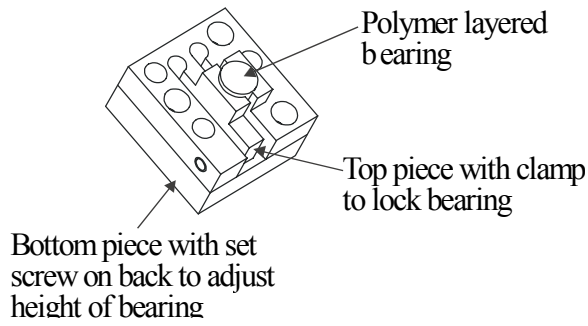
Second prototype bearing design with 6.35 mm radius of curvature.
